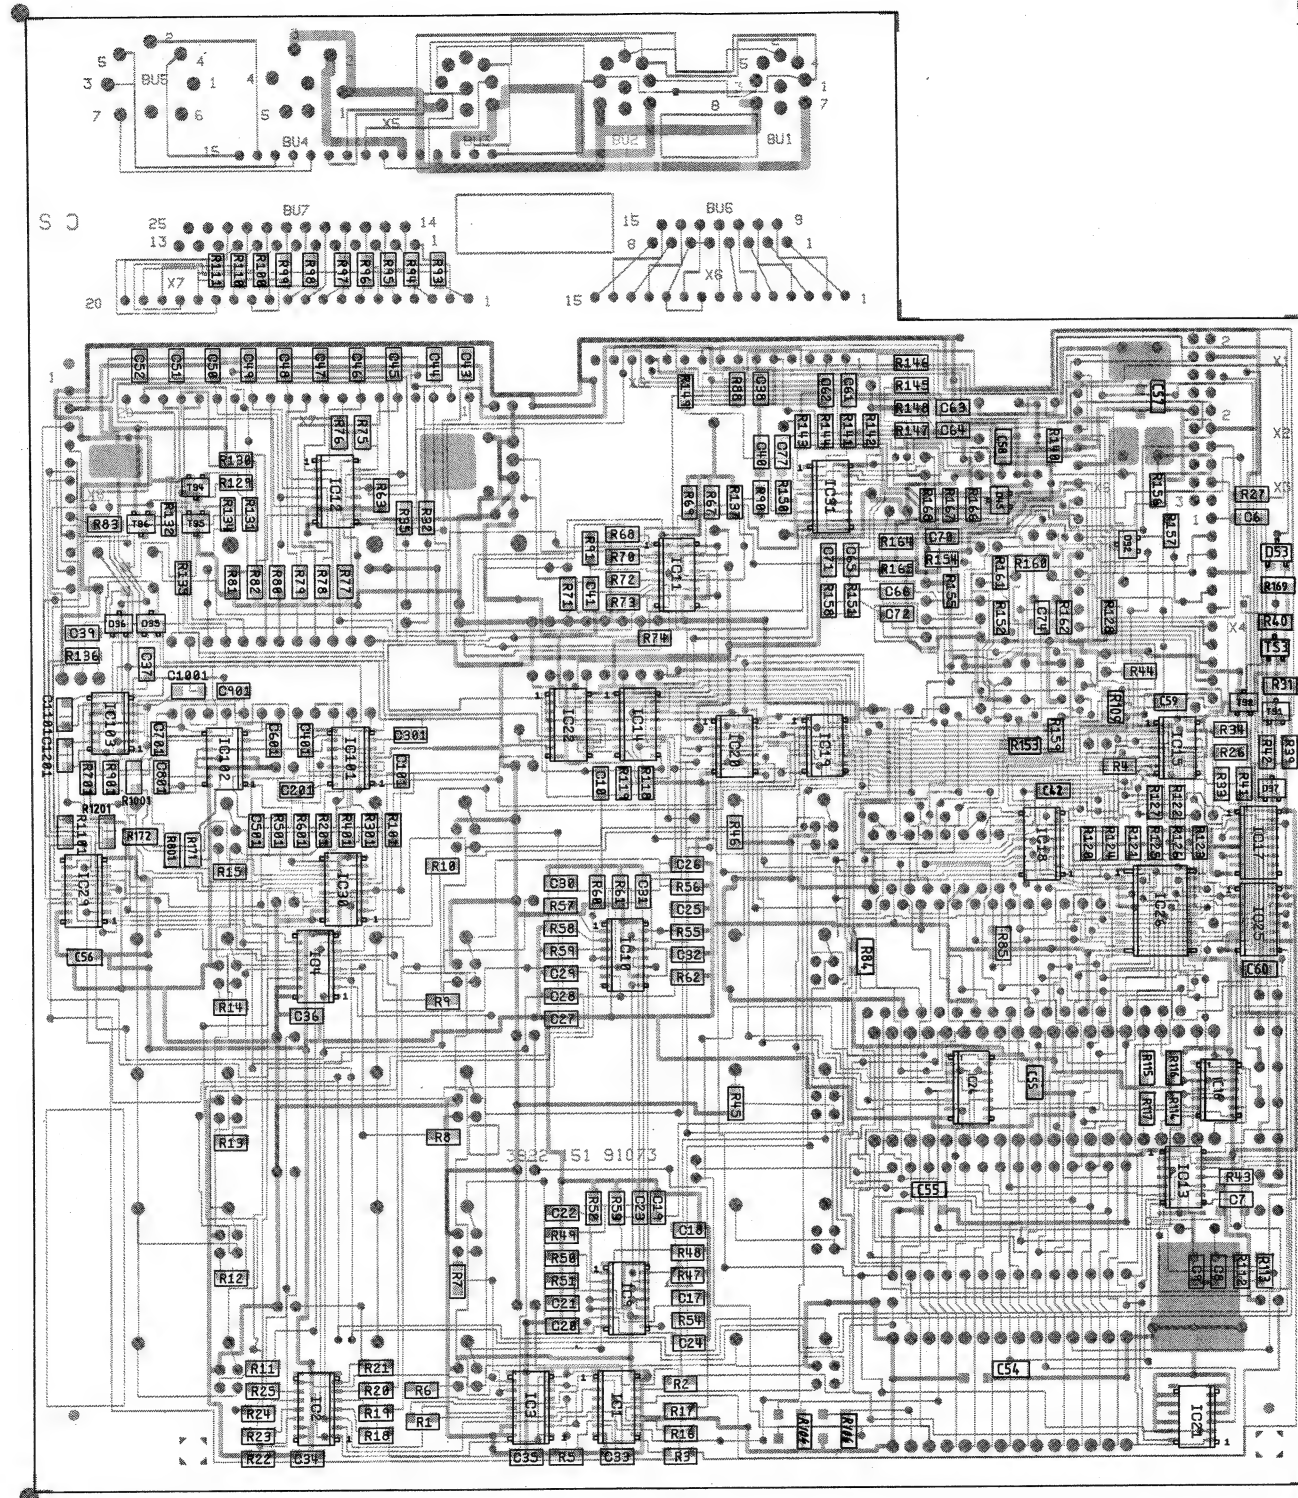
ASSEMBLY DIAGRAM OF LBB 3386/01, BOTTOM SIDE
